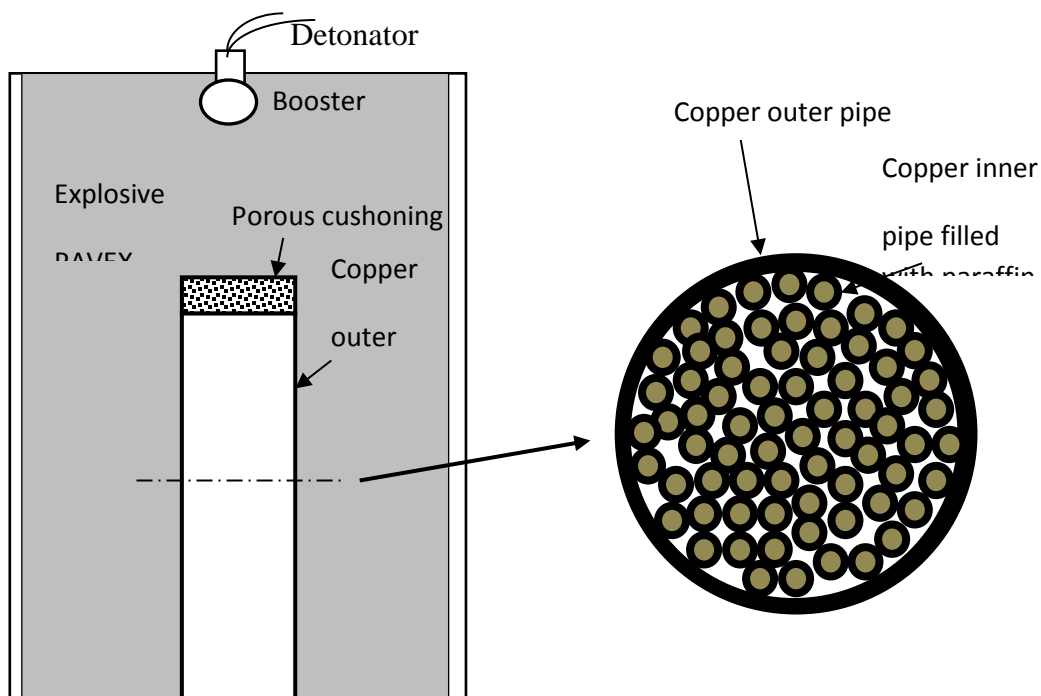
Cylindrical assembly used for making unidirectional porous structure.
